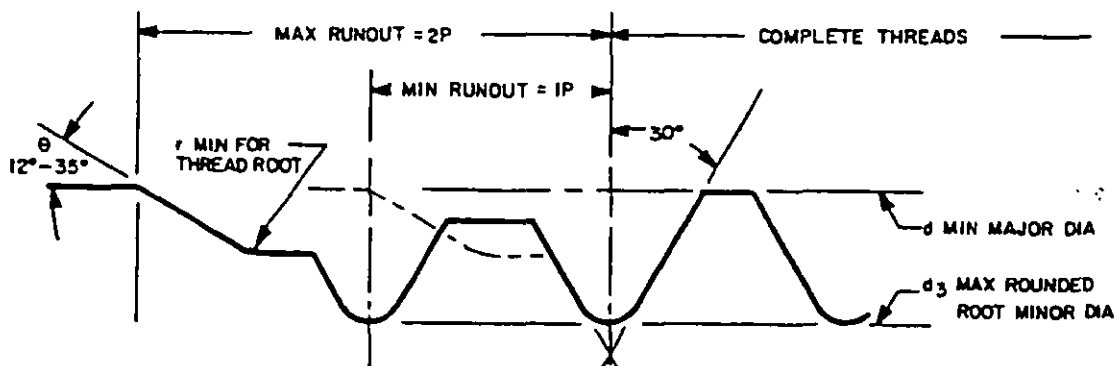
INCOMPLETE FORMED THREADS, FULL SHANK FASTENER - STANDARD DIAMETER
